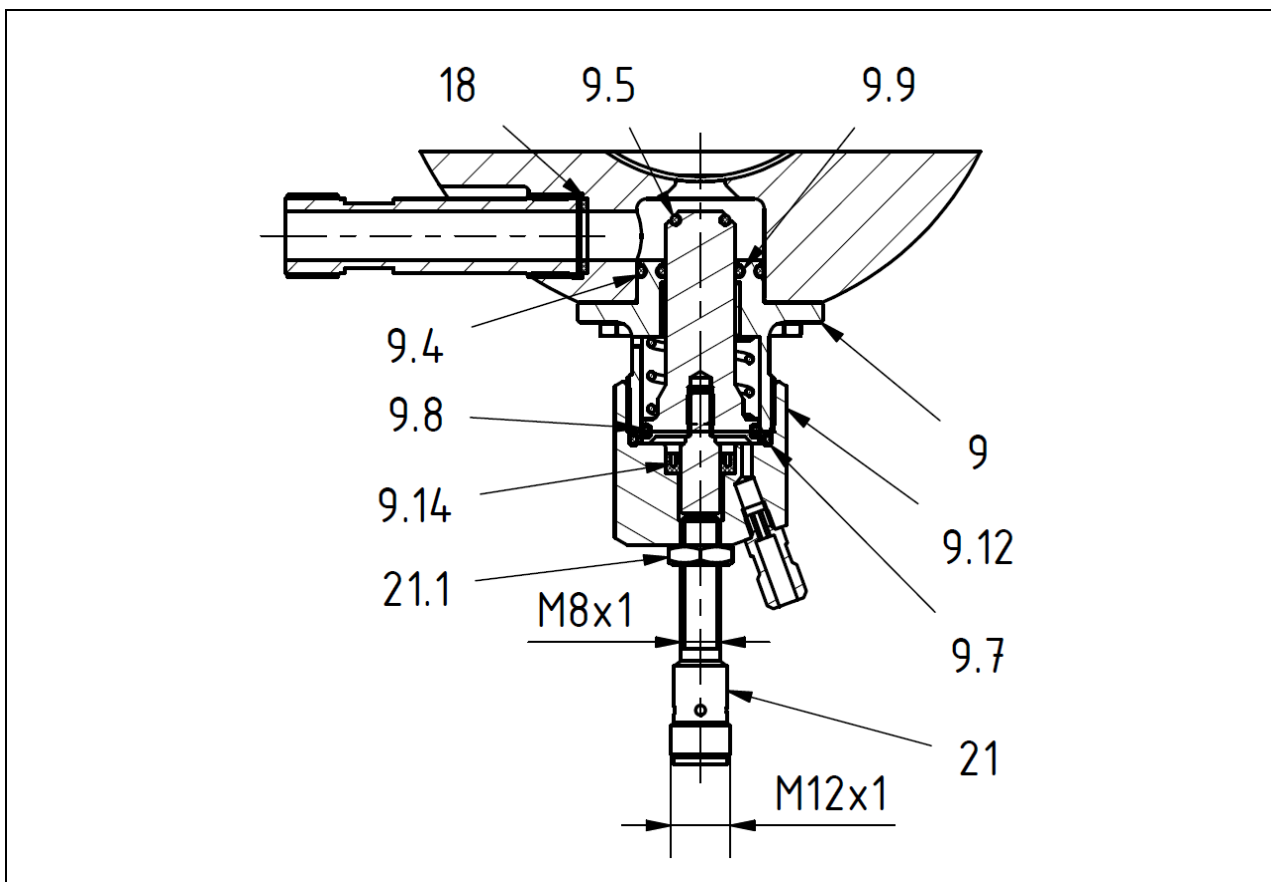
Pneumatic auxiliary valve with feedback and seals
